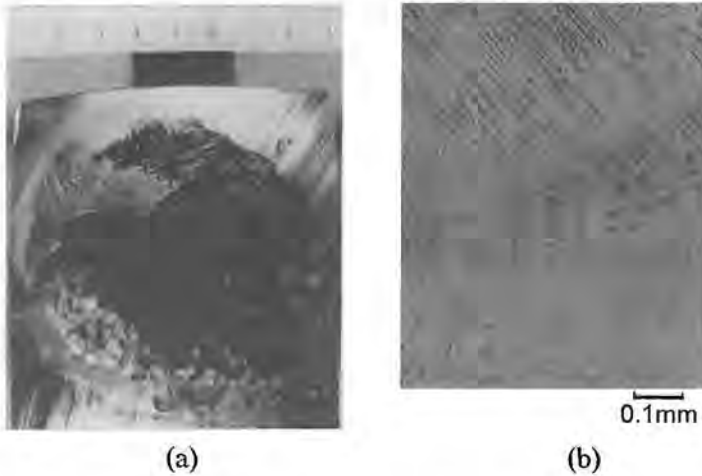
(a) Corrosion at weld repaired portion of impeller made of SCS 13 (1 year operation); (b) Cross-sectional micro-structure of the repaired weld metal.
